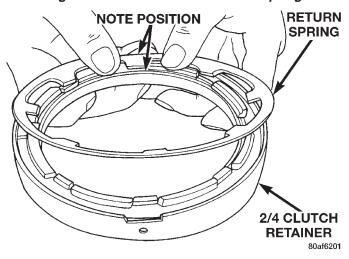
Proper Orientation of 2/4 Clutch Retainer and Spring
